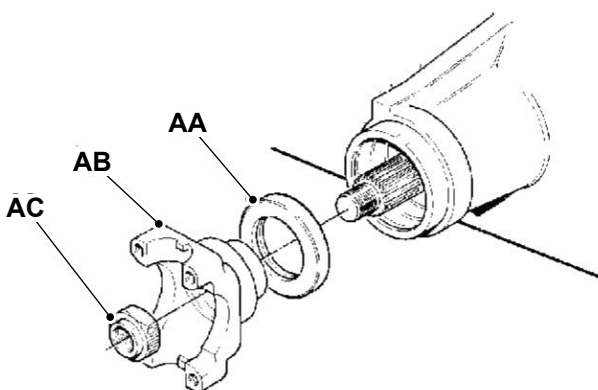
SD80 3 Piece Steer Drive Axle- Integral Brakes
